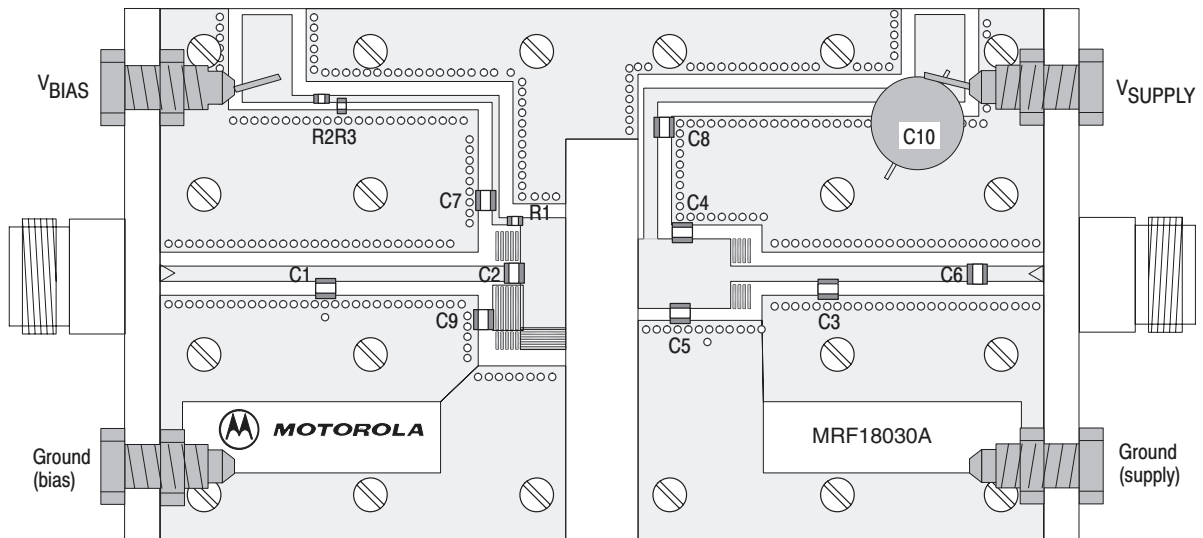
1805 – 1880 MHz Test Fixture Component Layout
